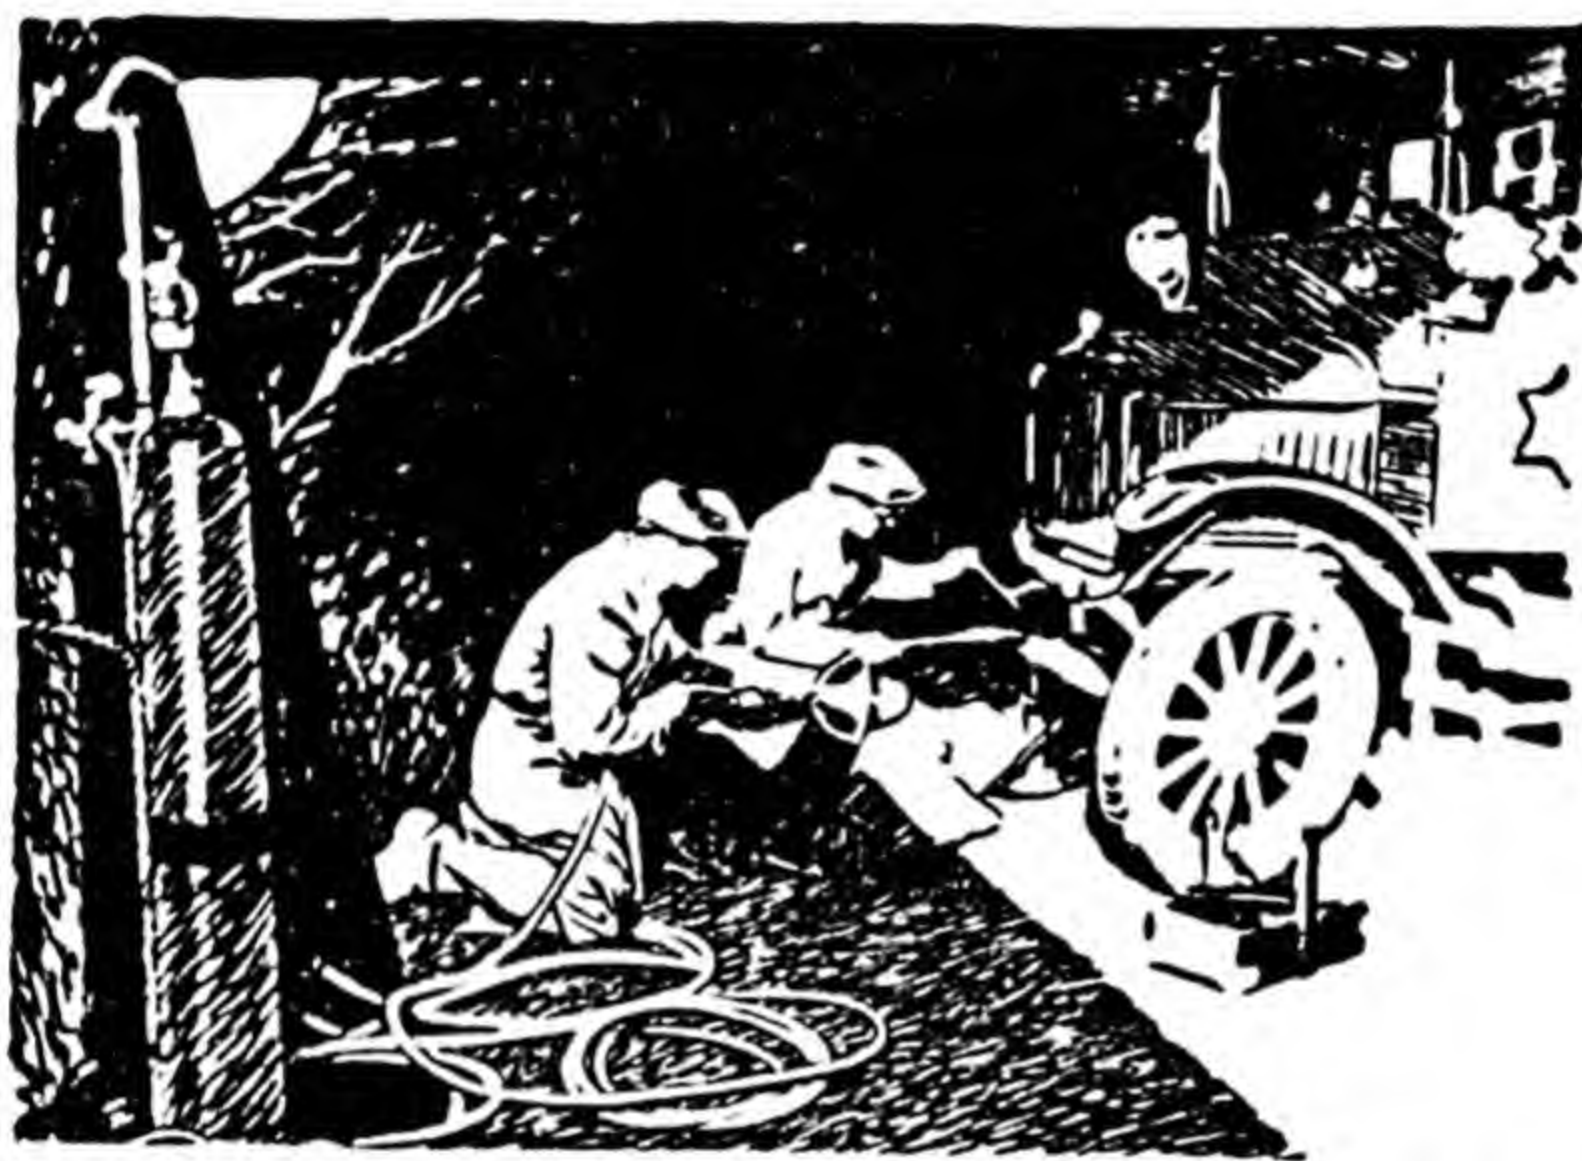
Welding a broken axle with an oxygen-and-acetylene (called oxyacetylene) flame.
